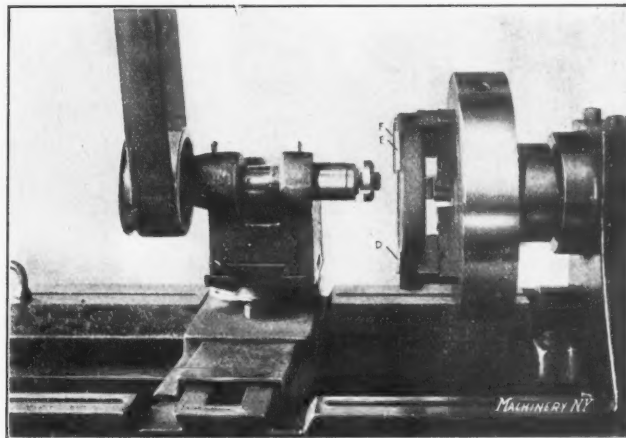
Milling Friction Bands for Countershafts, in the Lathe
